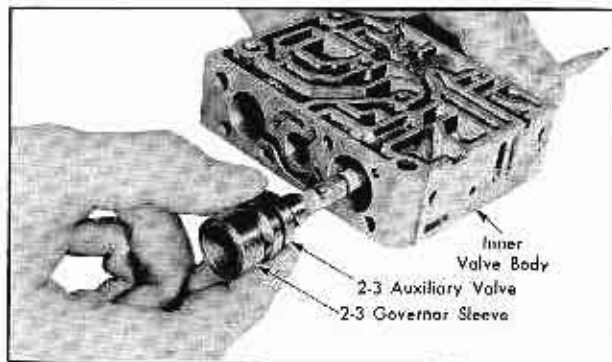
Removing 2-3 Governor Sleeve and 2-3 Auxiliary Valve
